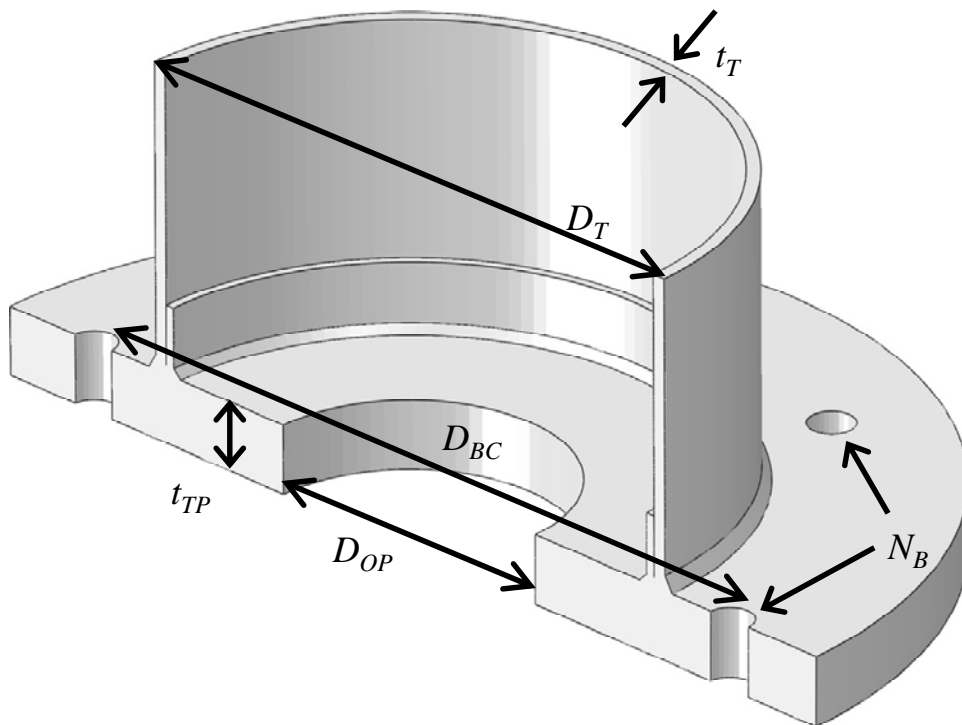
Geometric parameters for unstiffened groove-welded tube-to-transverse plate connection
